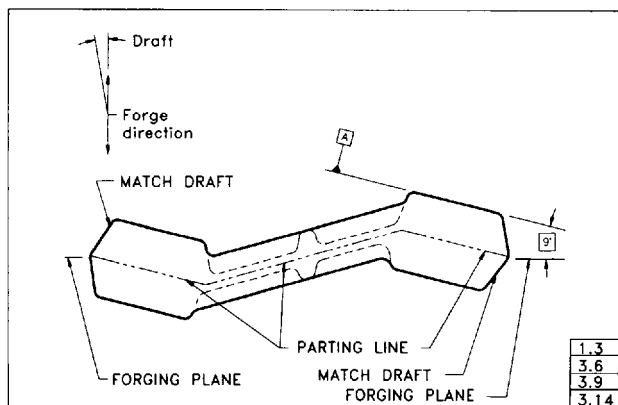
(b) DEFINED FORGING PLANE NOT PARALLEL TO DATUM PLANE
